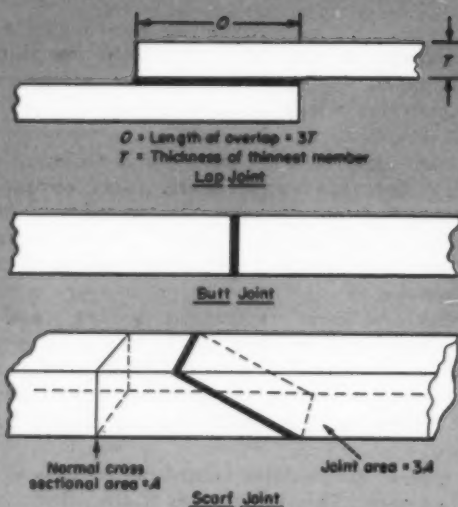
Basic types of brazed joints are lap joint, butt joint and scarf joint. Lap joints provide high strength, leak tightness and good electrical conductivity. Butt joints are smooth and have good appearance but are weaker and have higher electrical resistance than the lap joint. Scarf joint combines good properties of both lap and butt joints but is more difficult to produce
